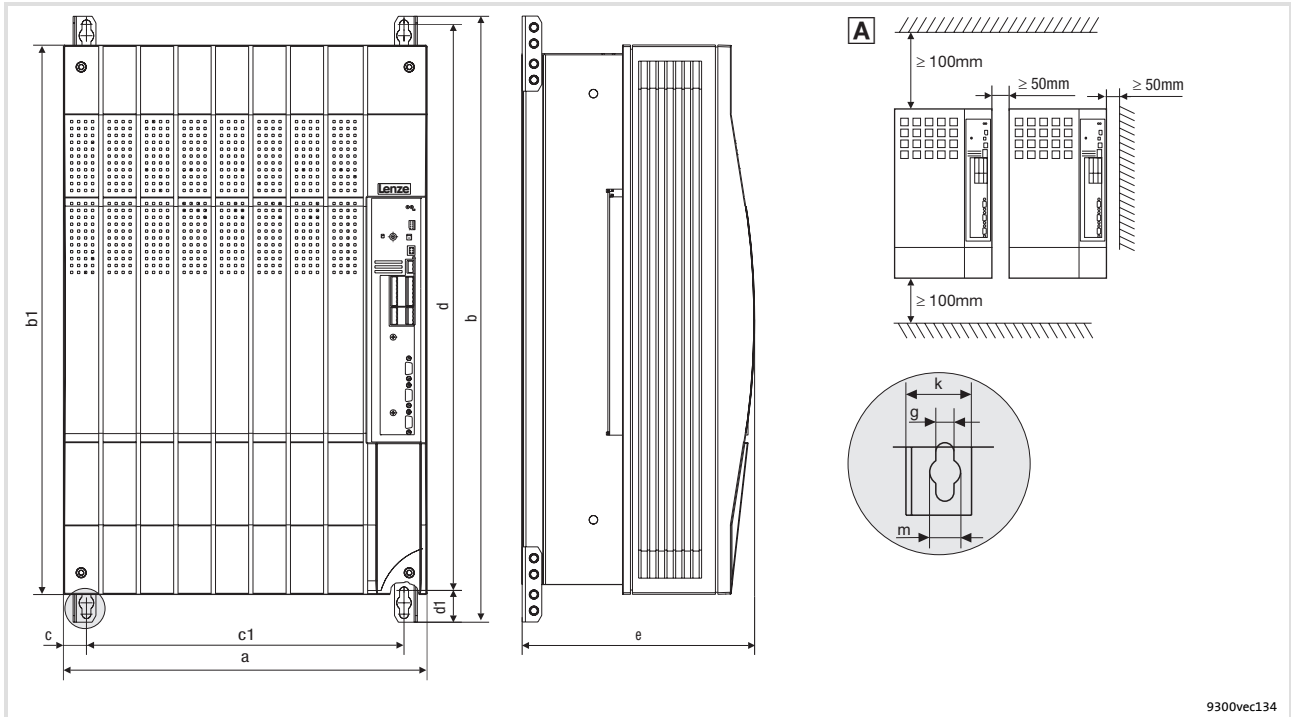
Standard mounting with fixing brackets 75 ... 90 kW
